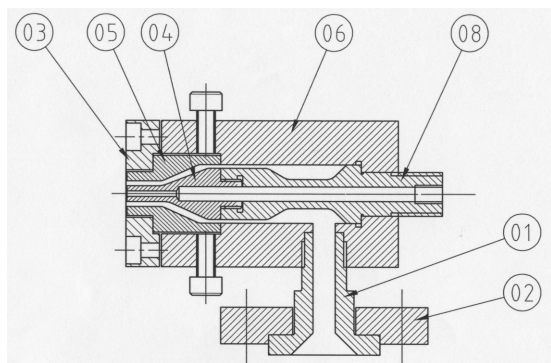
Mechanised screw extruder: die assembly schematic. 1) Die adapter, 2) Die clamp plate, 3) nozzle clamp ring, 4) mandrel, 5) die insert, 6) die body, and 8) mandrel threads. The heater band is not shown, but surrounds the die body.
